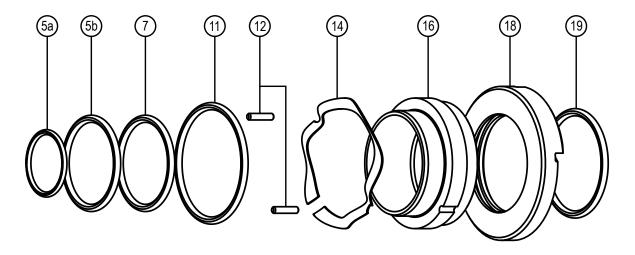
Single Seal Assembly for FZX 2350 - 2400 models
